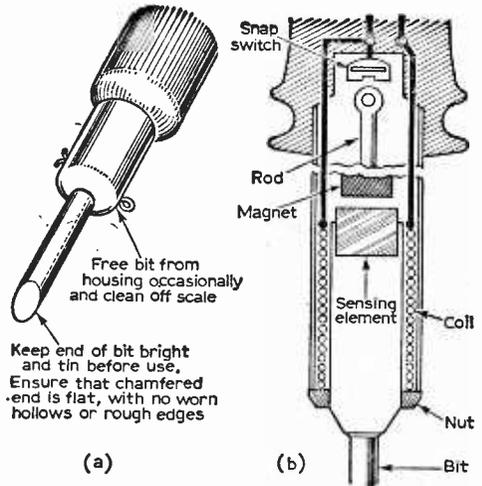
The iron bit should be kept well shaped, as shown here.
